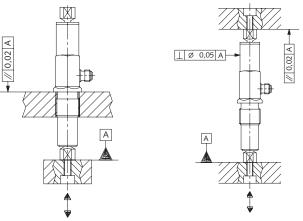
Mounting with M10x1 thread, front sided force introduction
